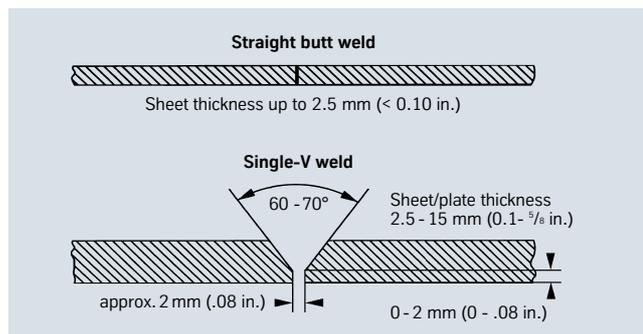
Edge preparation for welding of nickel alloys and special stainless steels.
